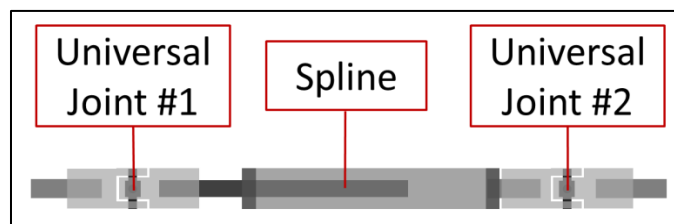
Pure moment loads were transferred to the test specimen through this shaft assembly, which includes a spline and two universal joints.
